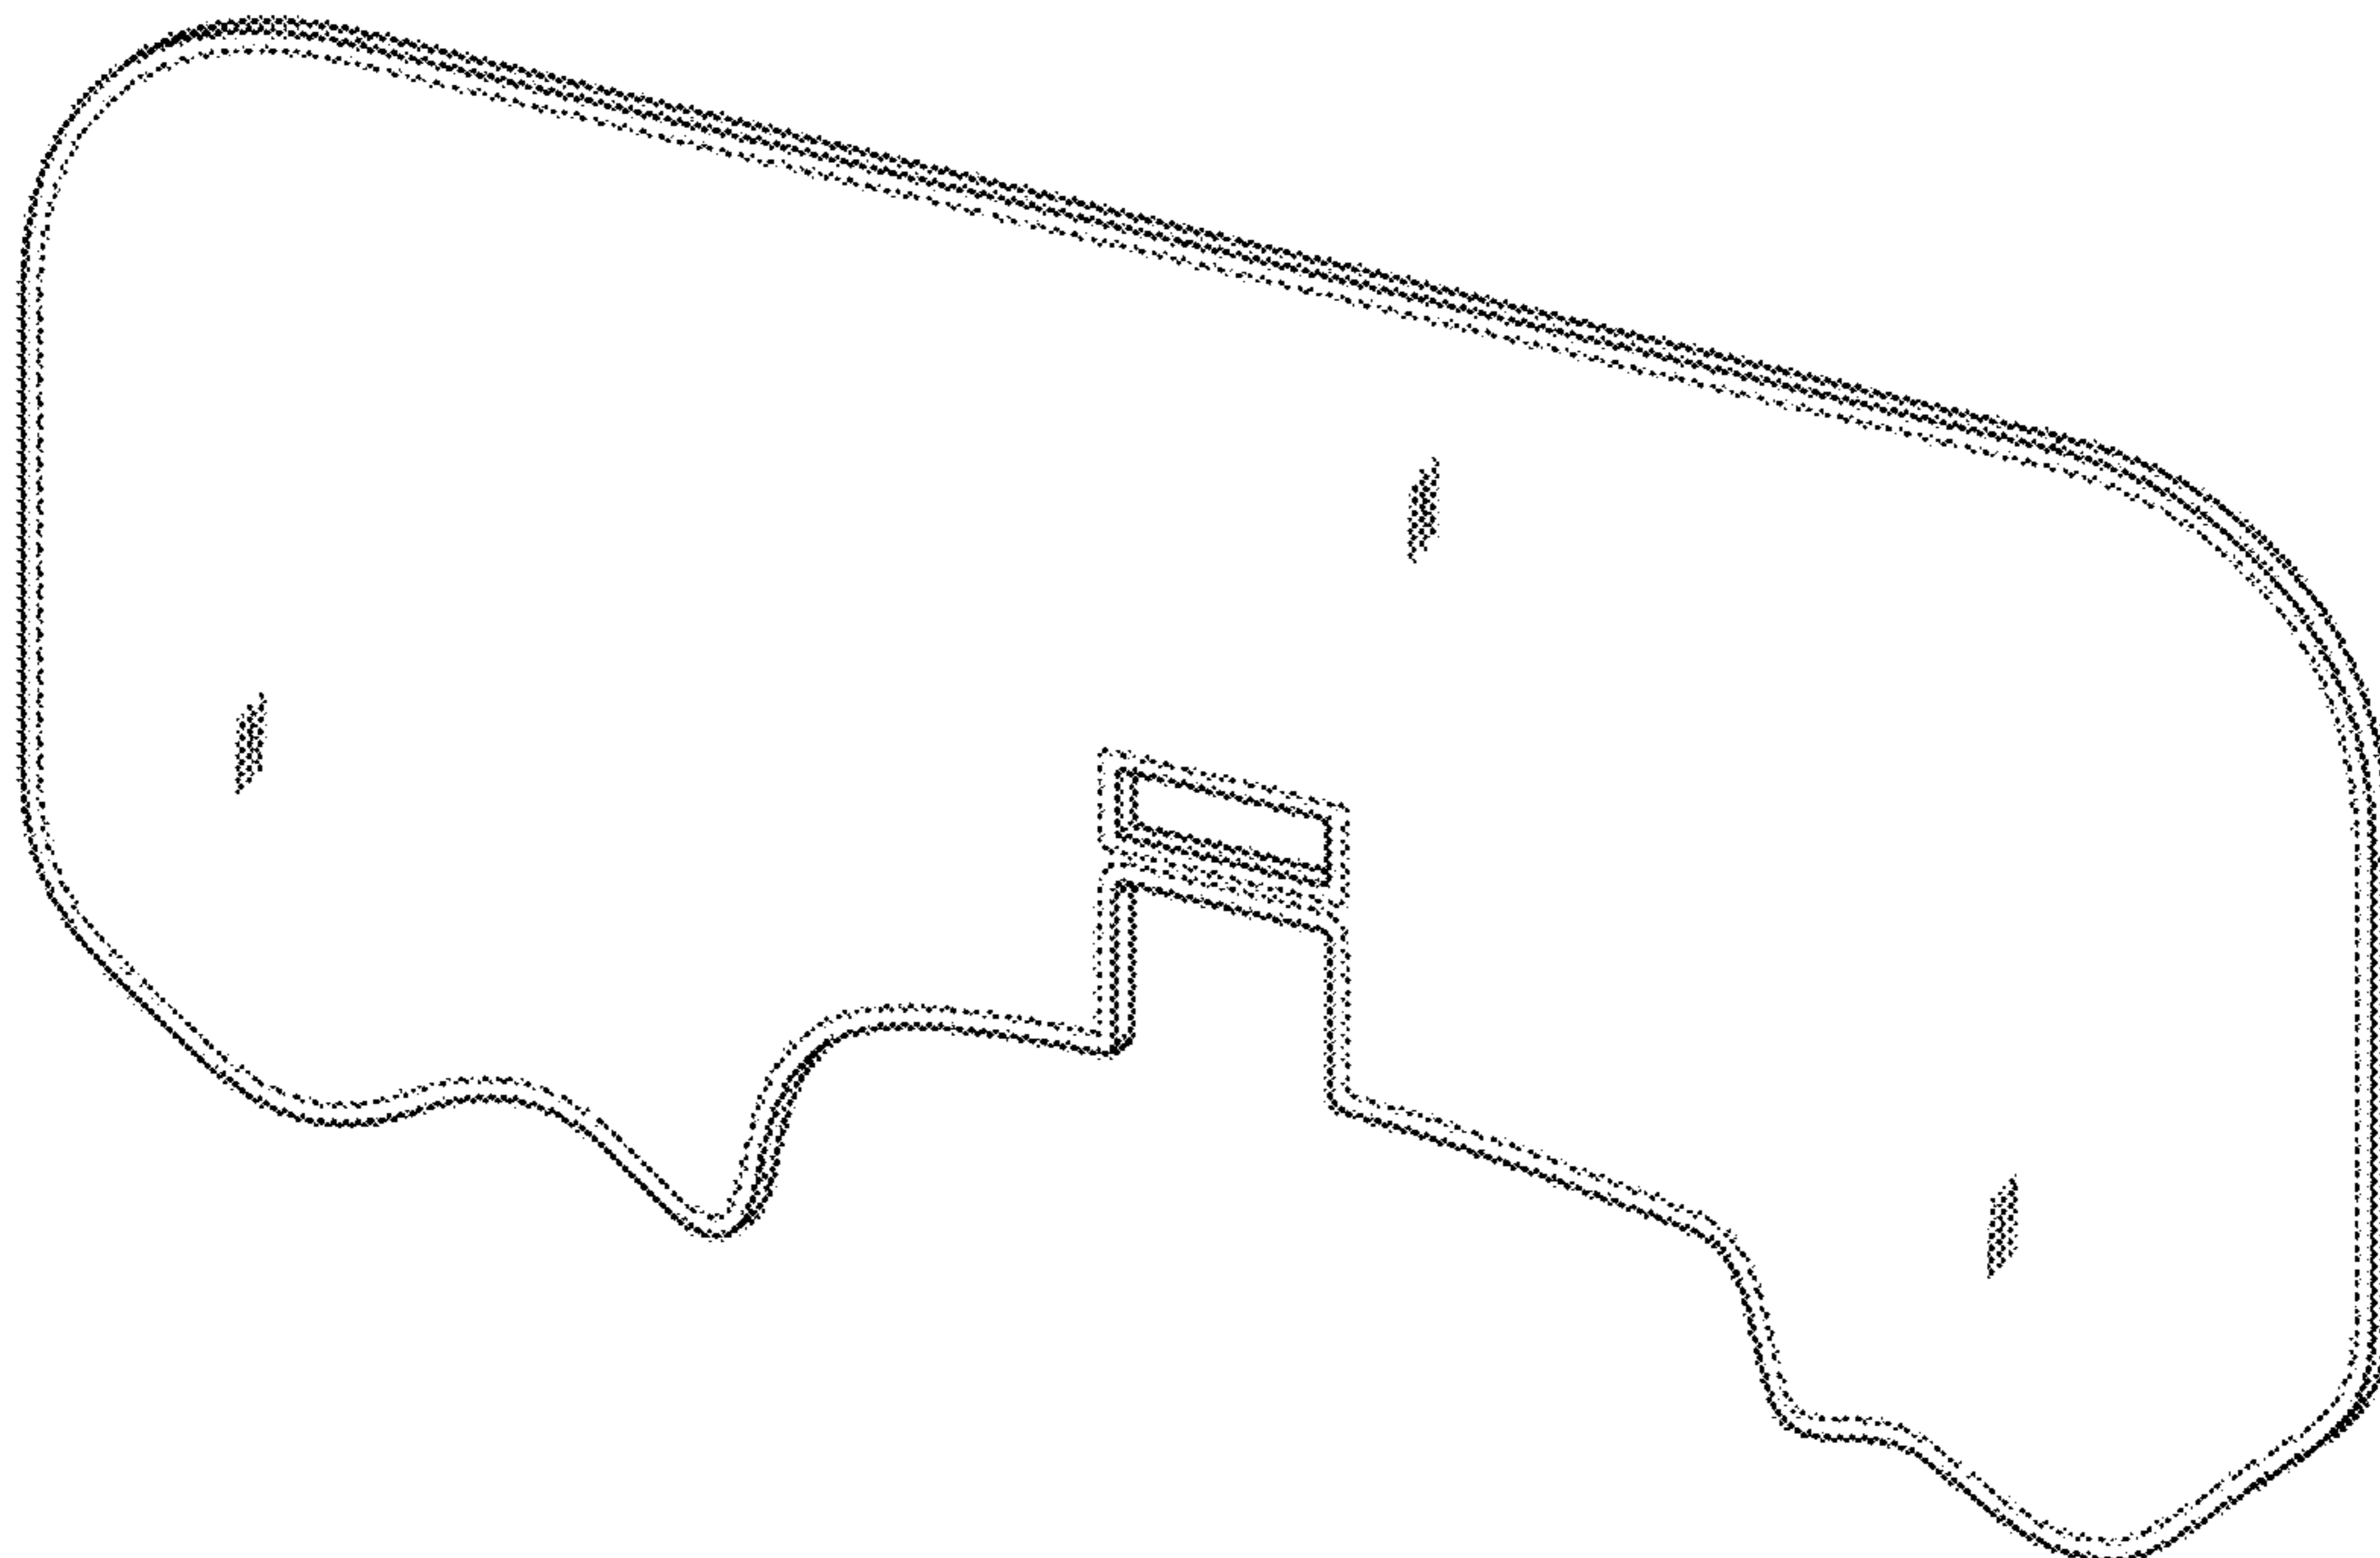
is a top plan view of the heat shield for a motorcycle.
